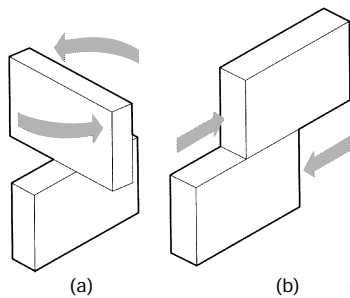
Slip gauges: (a) 'wring' the gauges together with a rotary motion to assemble them; (b) slide the gauges to separate them. (Note: Pulling the slip gauges apart damages the gauging faces)
